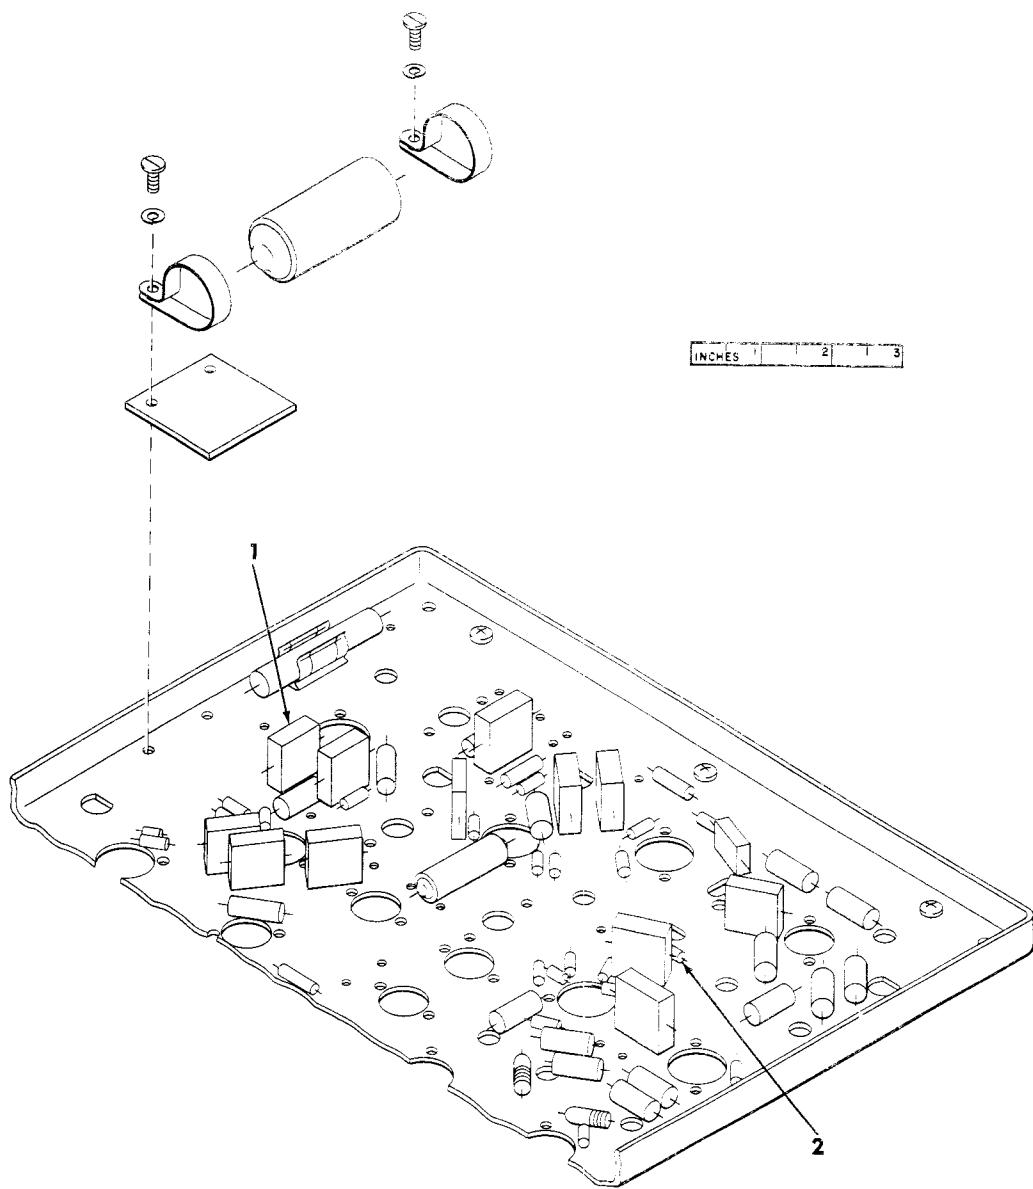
Generator assembly, pulse (9143996) - partial exploded view
